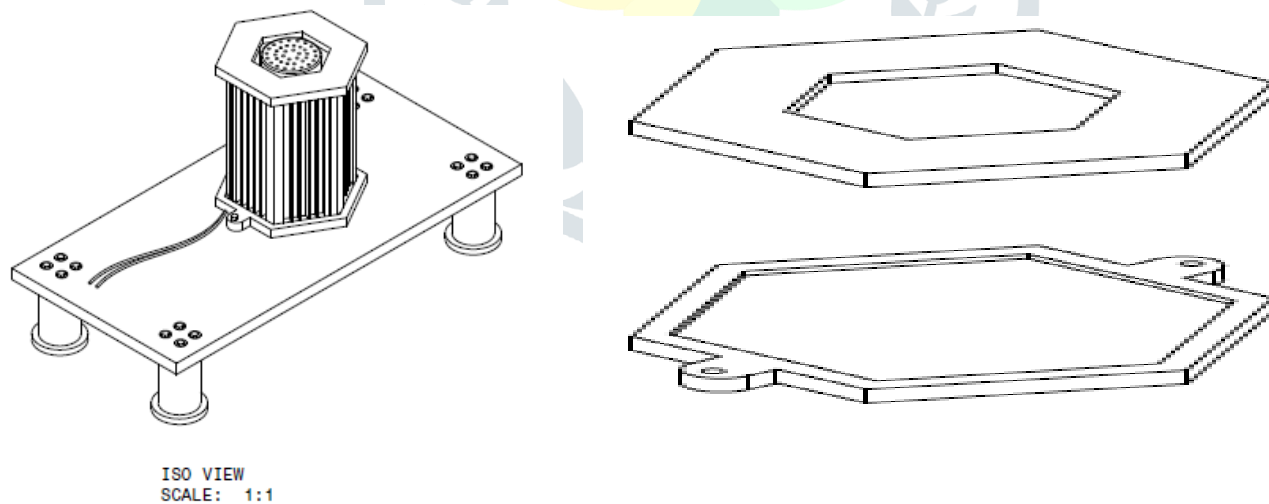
(a) Experimental set up Isometric View (b) Upper hexagonal part of the housing
